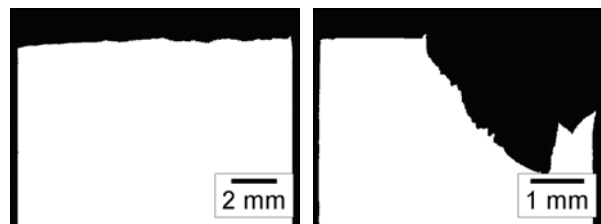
Fracture crack paths: E0 (left), E7 (right).
